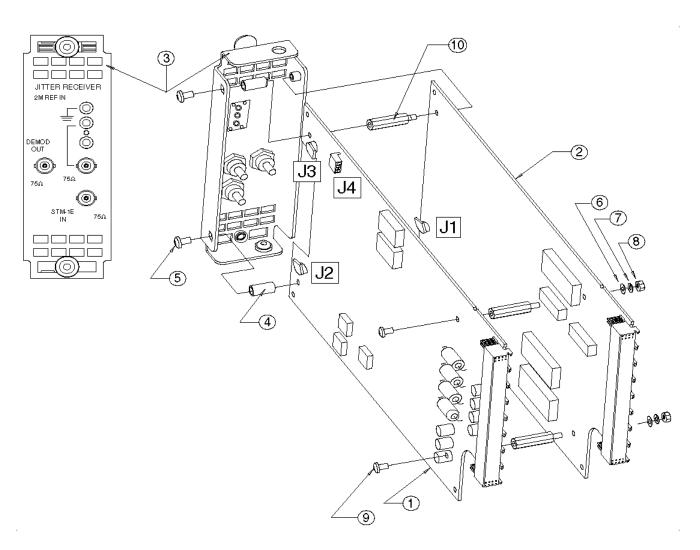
STM-1e Jitter Rx Module - Exploded View
